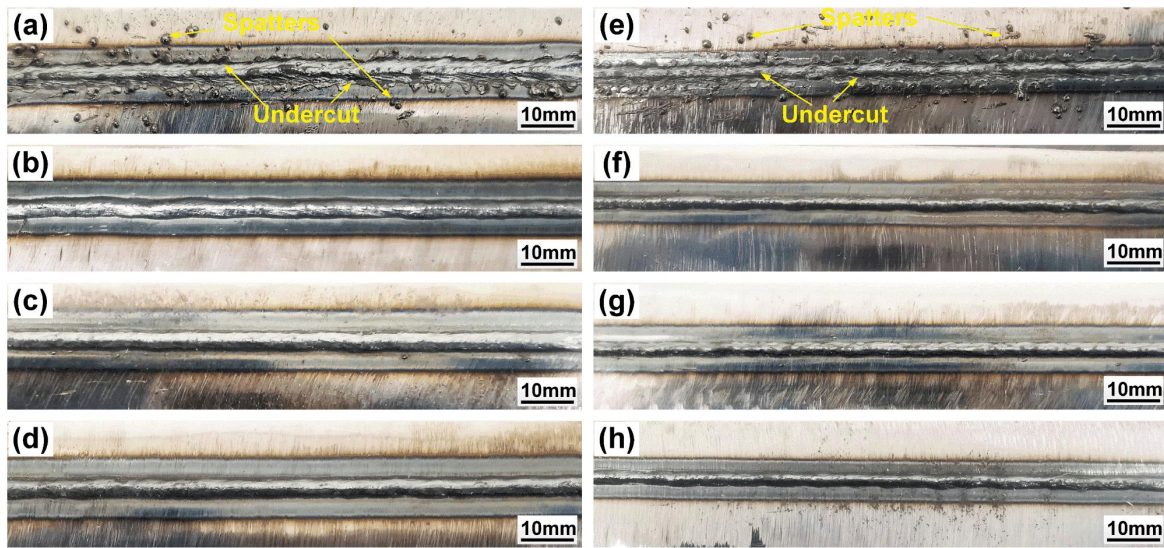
Weld surface morphologies with different wobble parameters: (a) without wobble,  $v = 1.0$  m/min; (b) circular wobble,  $A = 0.5$  mm,  $v = 1.0$  m/min; (c) circular wobble,  $A = 1.0$  mm,  $v = 1.0$  m/min; (d) figure-eight wobble,  $A = 0.5$  mm,  $v = 1.0$  m/min; (e) without wobble,  $v = 1.5$  m/min; (f) circular wobble,  $A = 0.5$  mm,  $v = 1.5$  m/min; (g) circular wobble,  $A = 1.0$  mm,  $v = 1.5$  m/min; (h) figure-eight wobble,  $A = 0.5$  mm,  $v = 1.5$  m/min.
